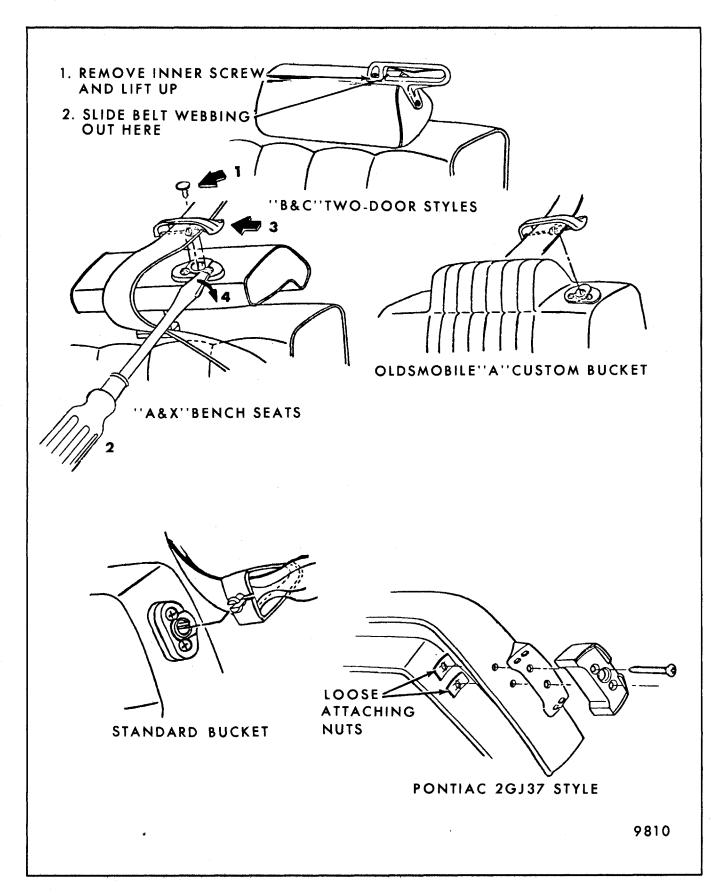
Shoulder Belt Guide Loop - Removal
